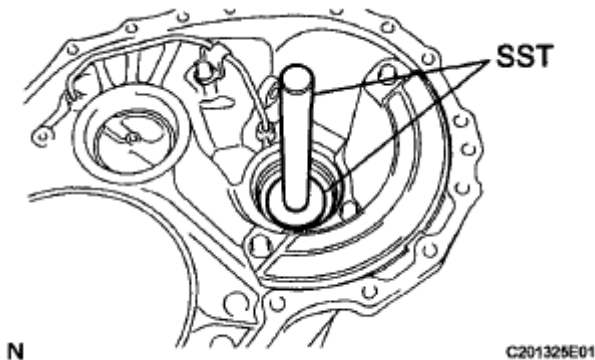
Removing Front Transaxle Case Oil Seal And Transaxle Housing
